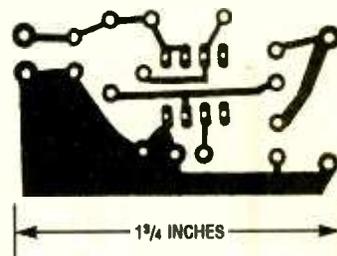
The switching regulator was assembled on a small printed-circuit board. This full-sized, printed-circuit template can be used to etch your own board.
